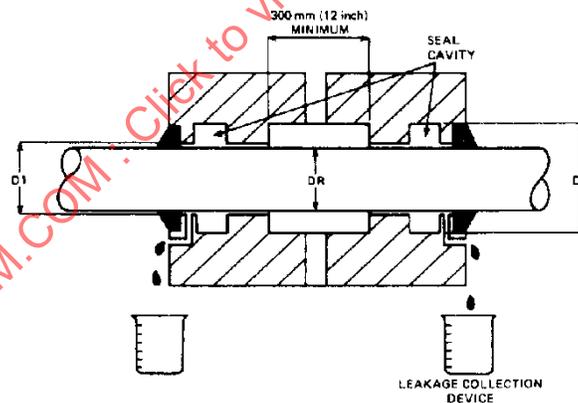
TYPICAL TEST SETUP FOR CYLINDER ROD SEAL ENDURANCE TEST
